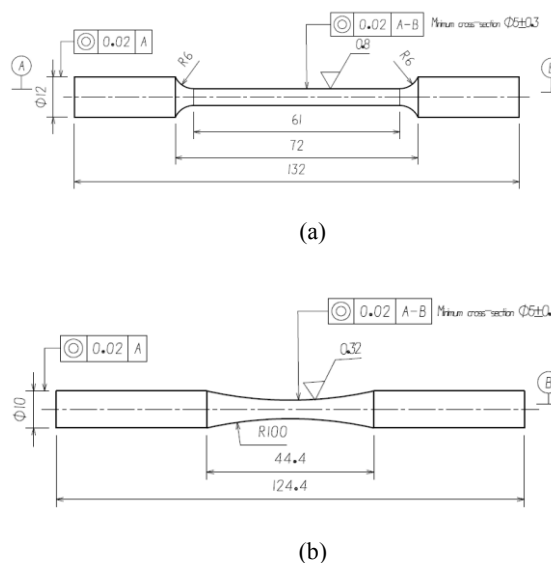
Schematics of the test specimens (a) tensile specimen; (b) fatigue specimen.
